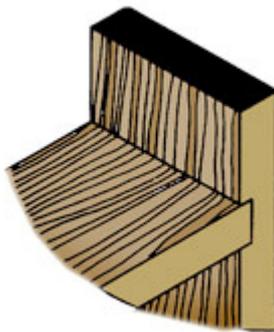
Make a dado joint by cutting a slot into one piece of wood to match the end of the other.
